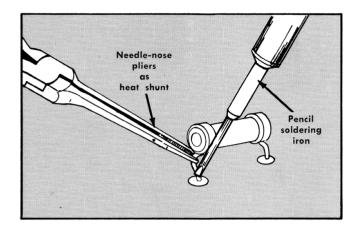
Apply the soldering iron to the heat-shunted lead when removing a component from a circuit card.
